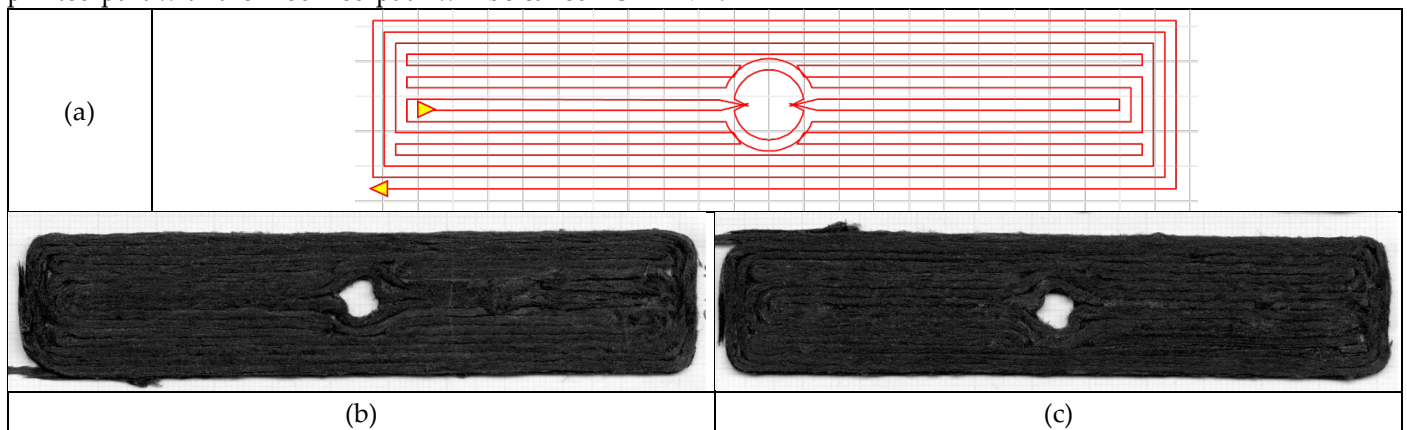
Modified curvilinear open hole printing: (a) modified printing path with the overshooting inward through the centre of the hole; (b) and (c) example of the printed sample on top and bottom surface. 376
